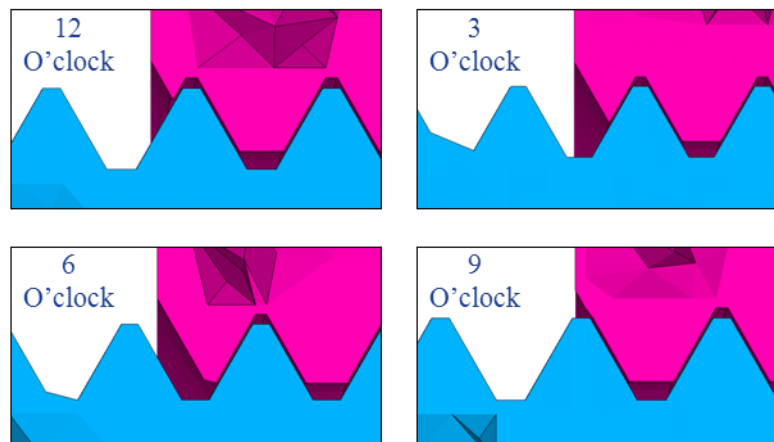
Helical Thread Cross-Sections at 3, 6, 9, and 12 O'clock
